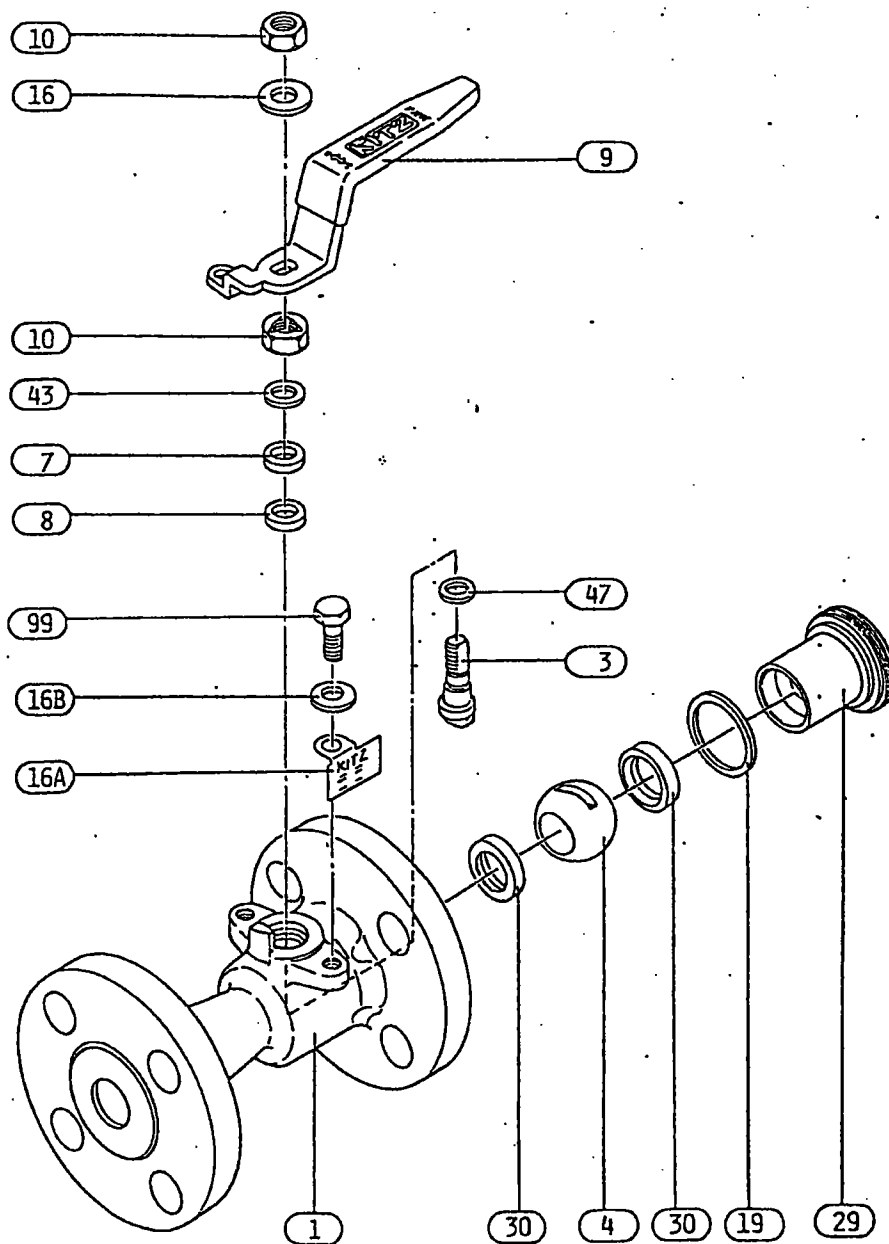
Disassembly illustration of $\frac{1}{2}$ " to 1" valves
